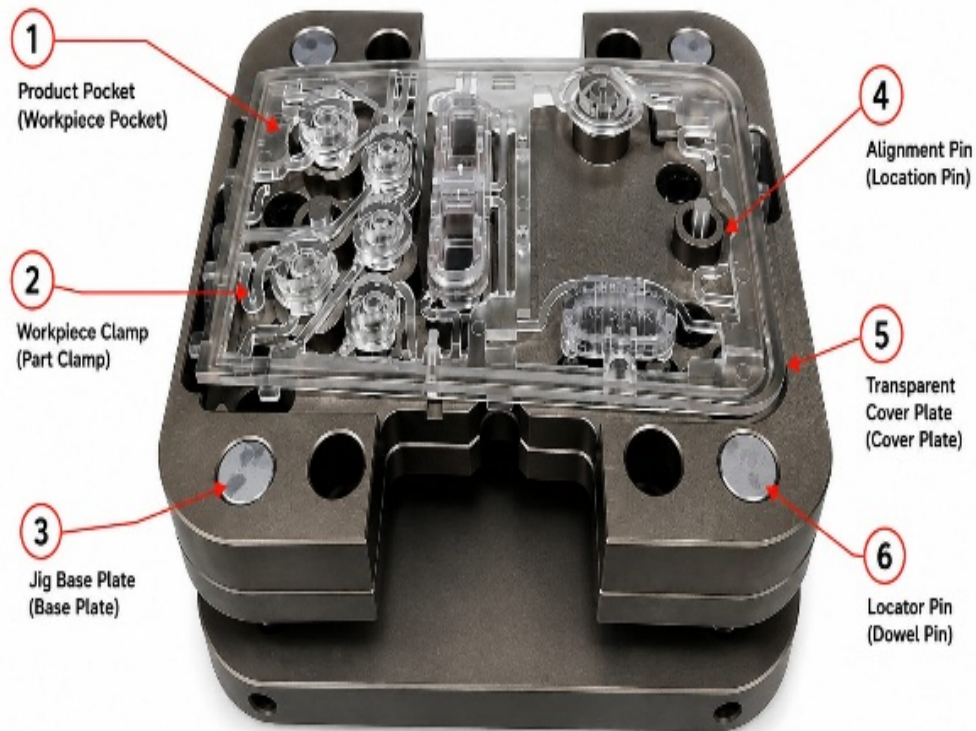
The physical configuration of the modified multi-station jig section on the pad printing machine.
